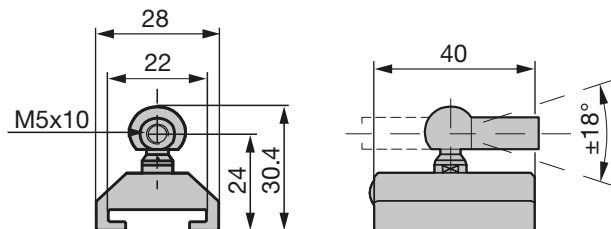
Installation dimensions of BTL5-F-2814-1S magnet
